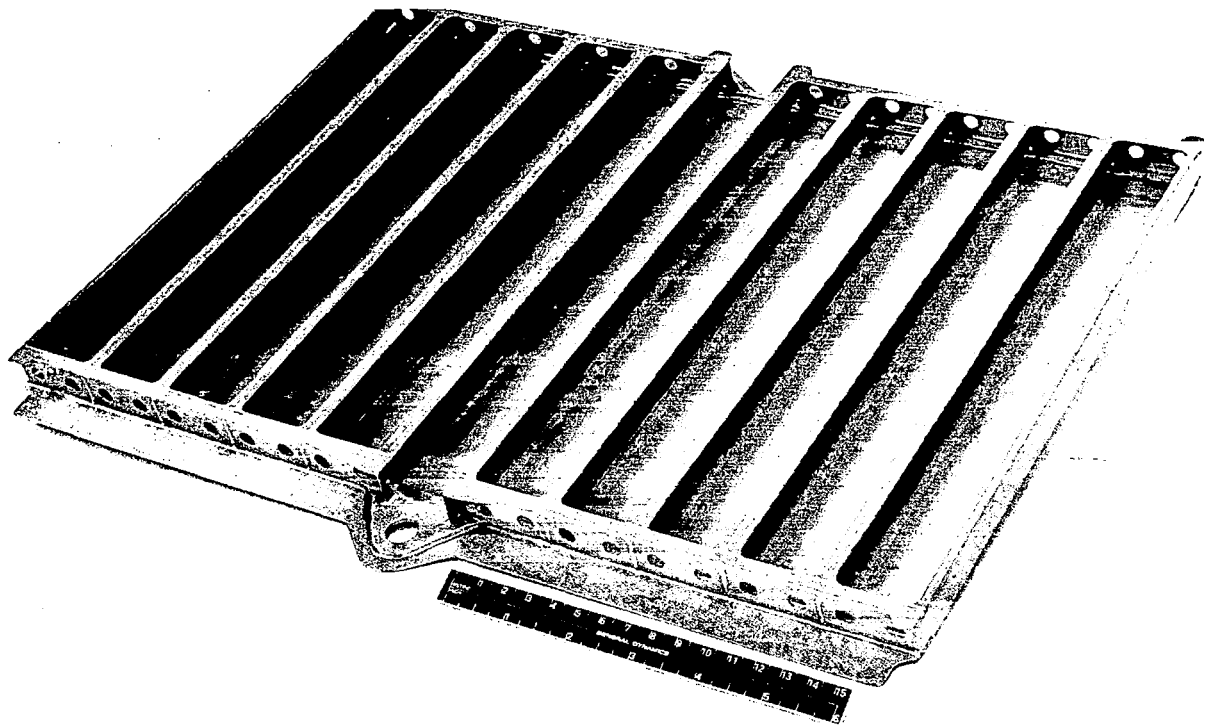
Interior View of Electron Beam Welded Tee-Stiffened Cb-752 Heat Shield (Photo 12-8326)
